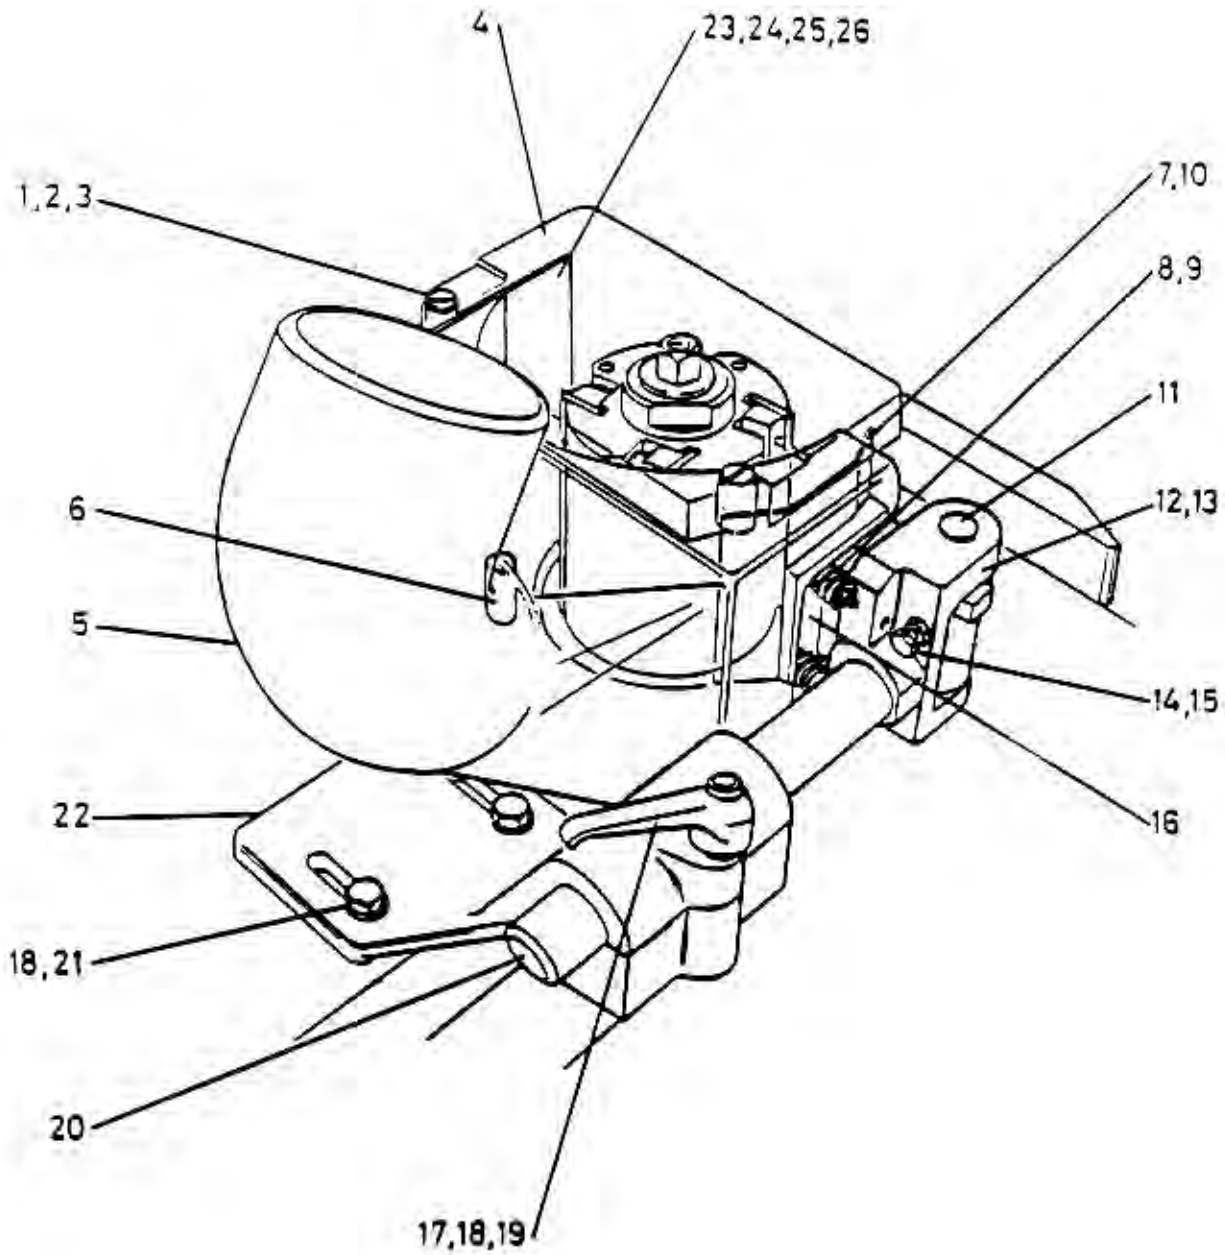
NEAR SIDE HEAD CHIPBREAKER
